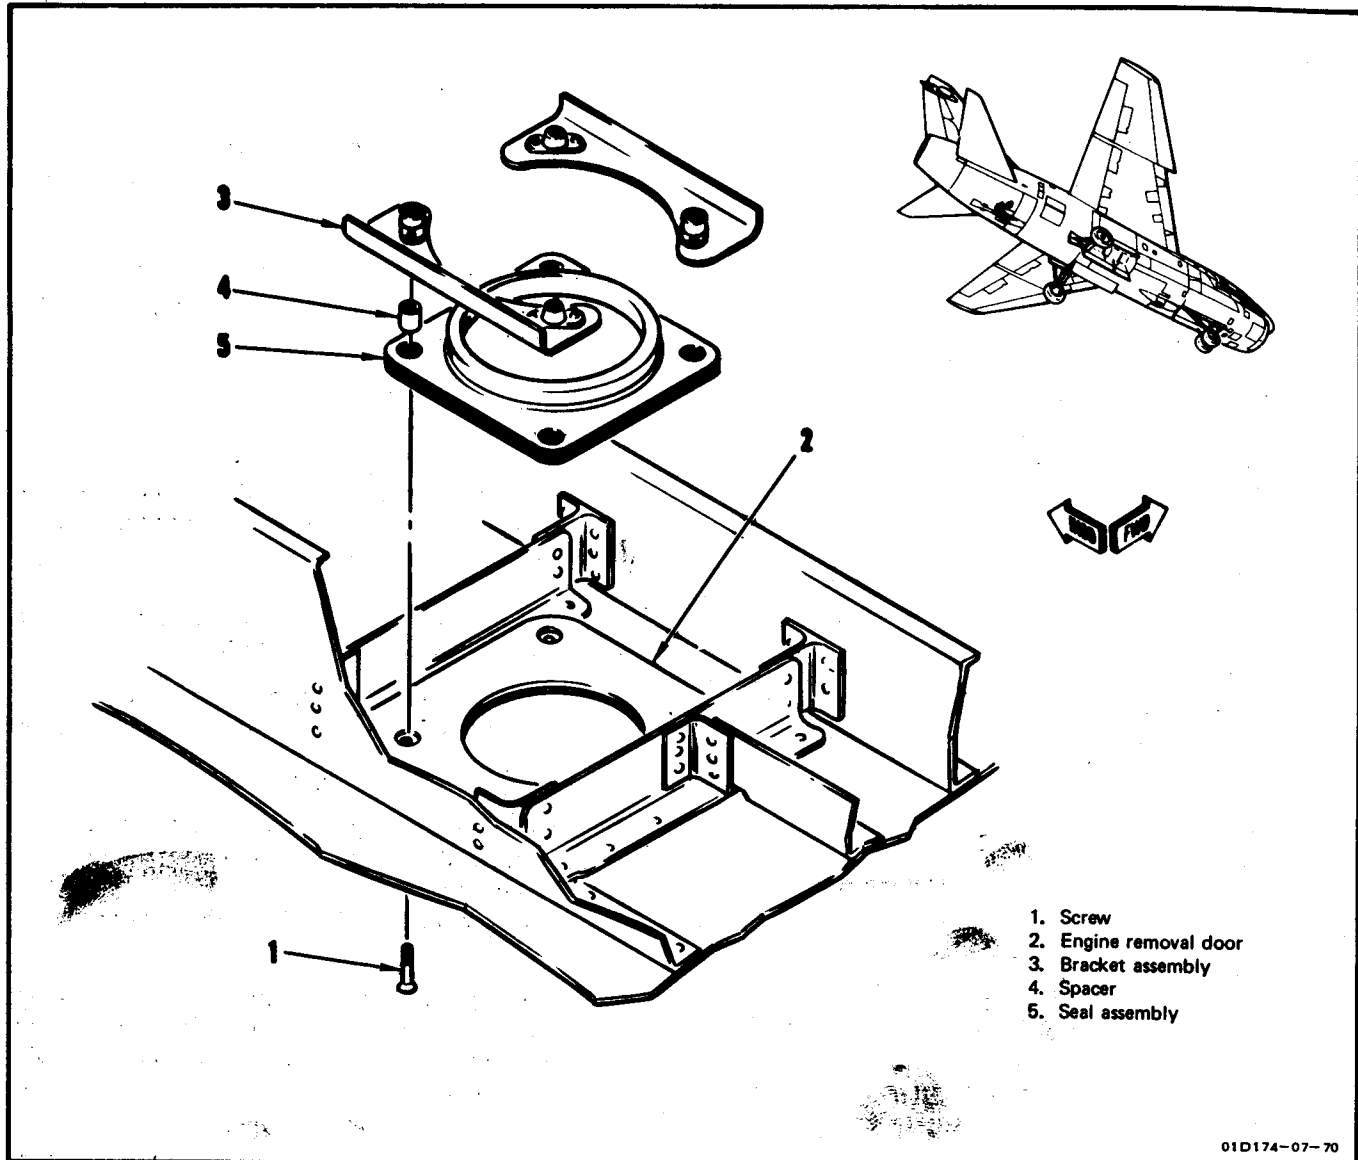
Engine Low Pressure Cooling Duct Seal Removal and Installation
